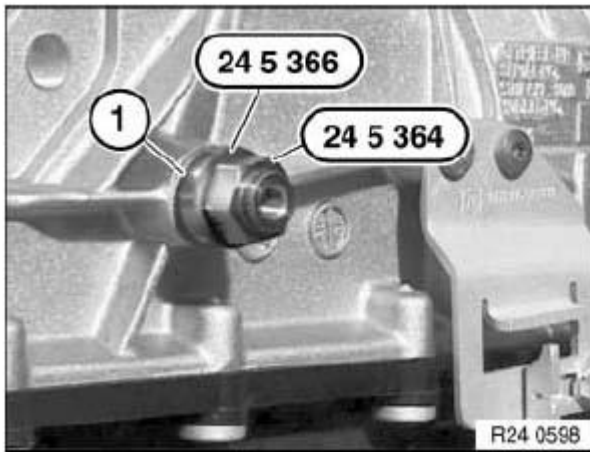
Screwing In Shaft Seal With Special Tools 24 5 366 And 24 5 364
